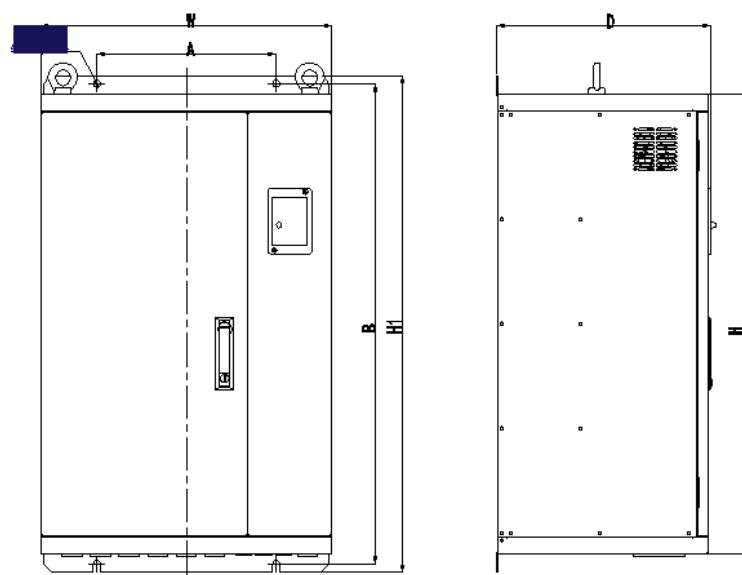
Appearance and installation dimension of FC155 series (Metal housing structure)
